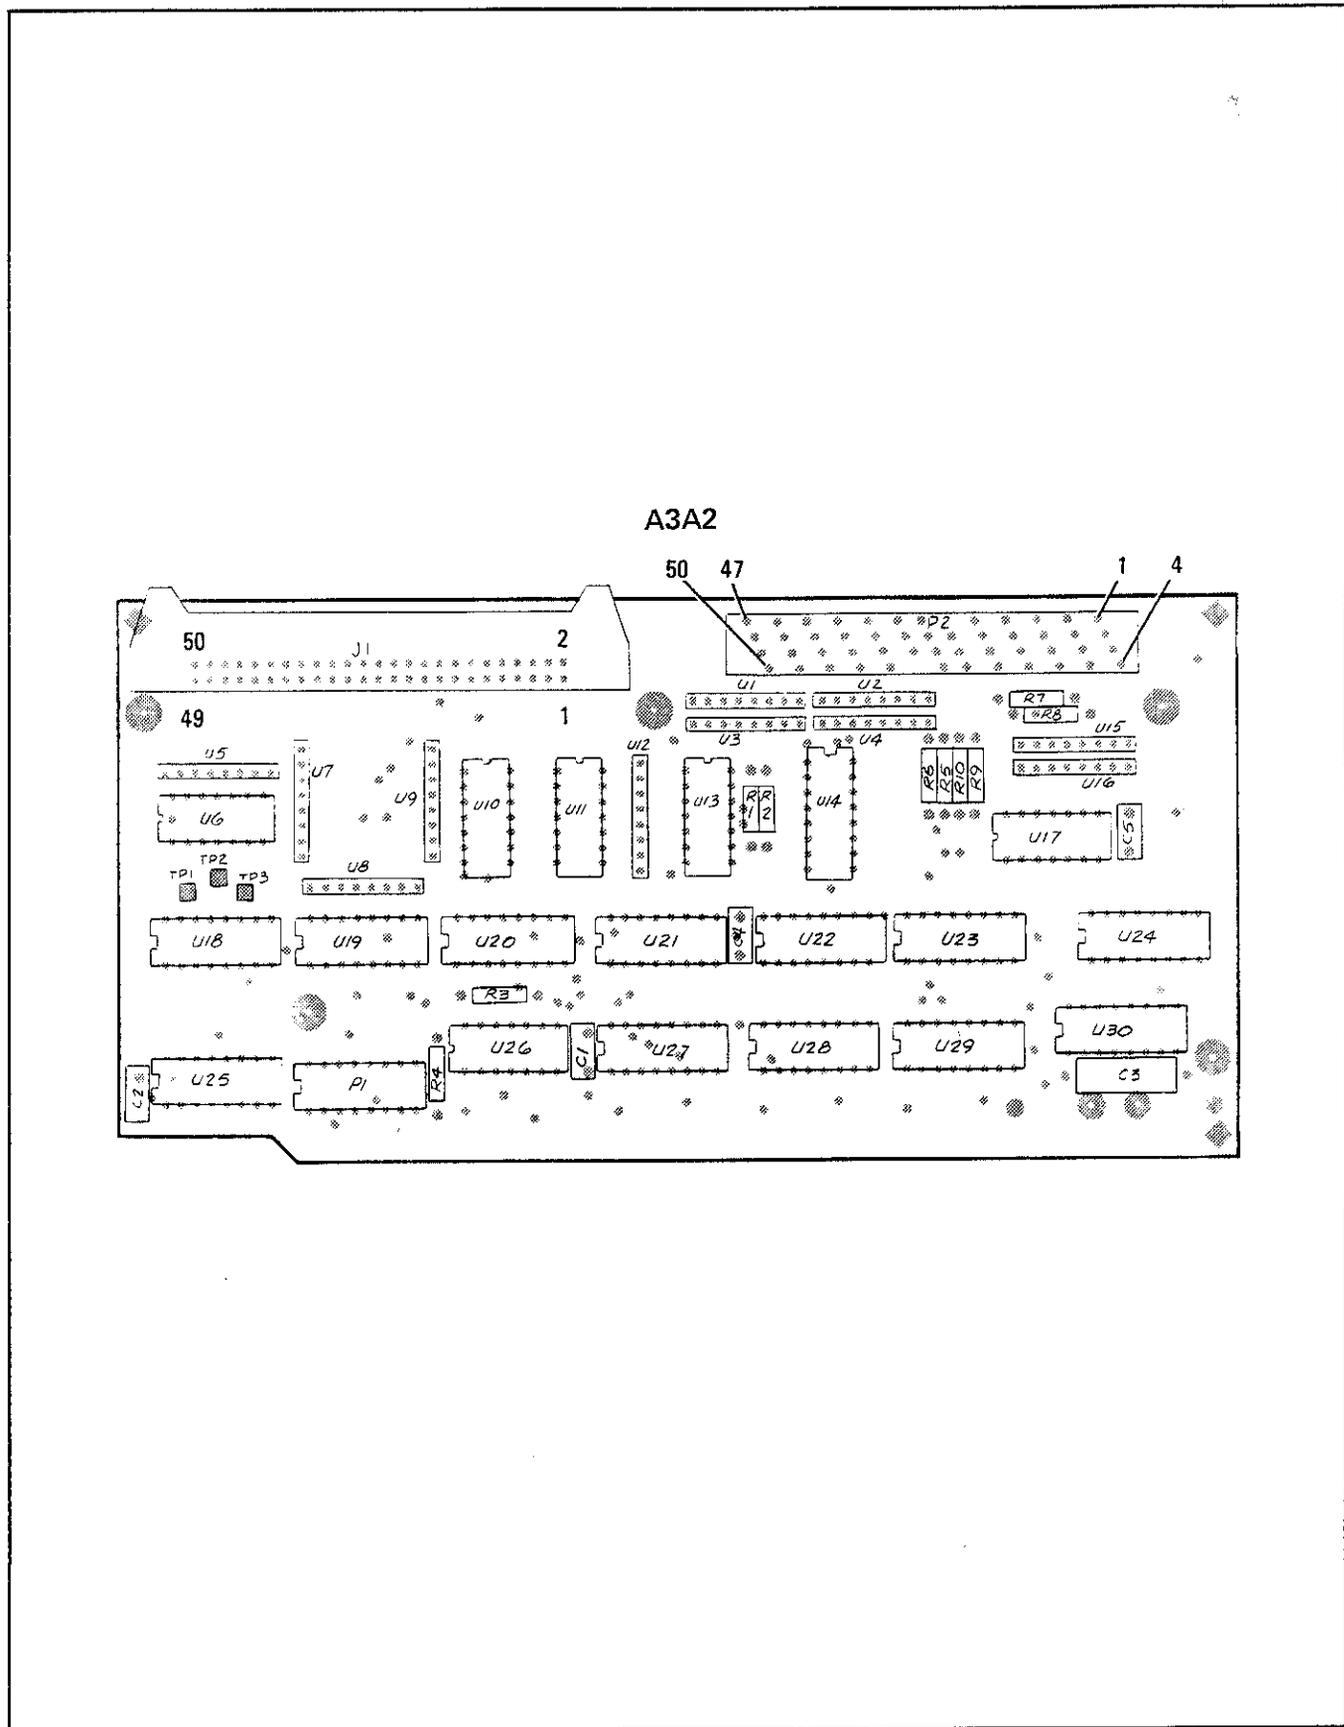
A3A2 Auxiliary Front Panel Parts Locations
